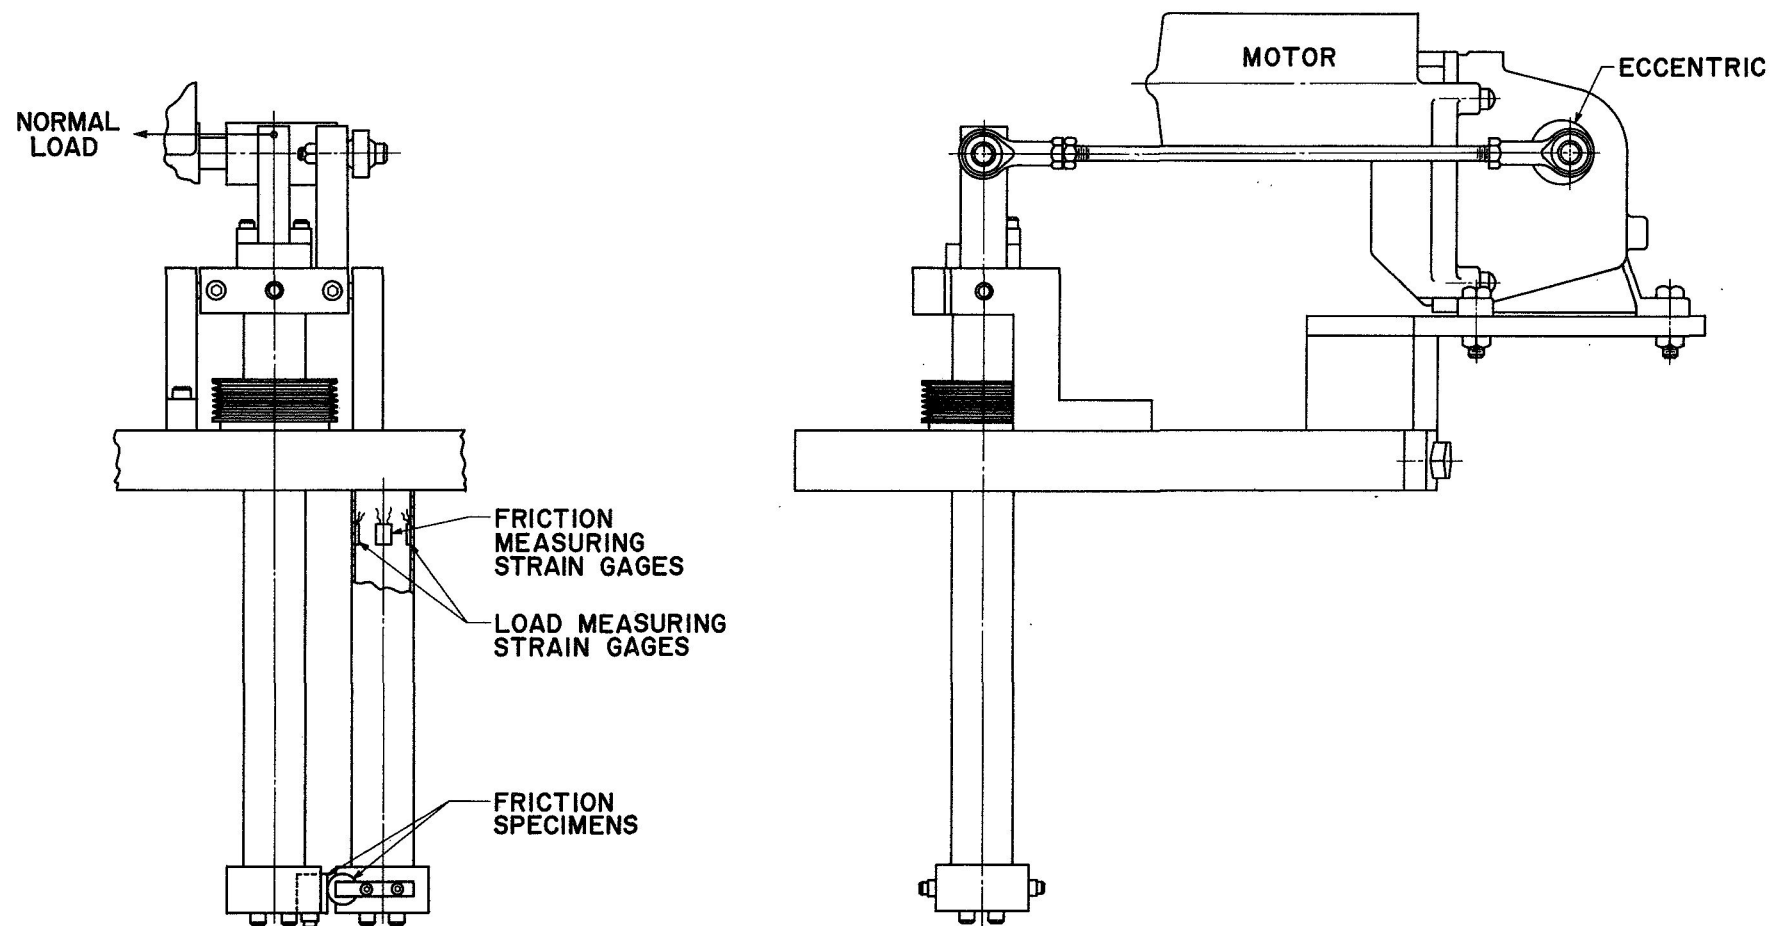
ASSEMBLY OF OSCILLATING FRICTION APPARATUS
